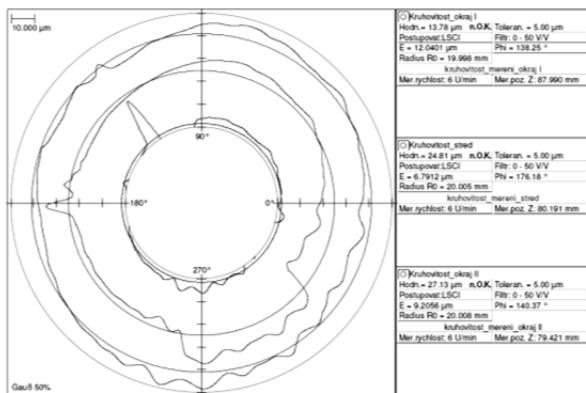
Roundness of Workpiece, corrosion surrounding with oil supply, SG grain, after 78 hours dynamic load
